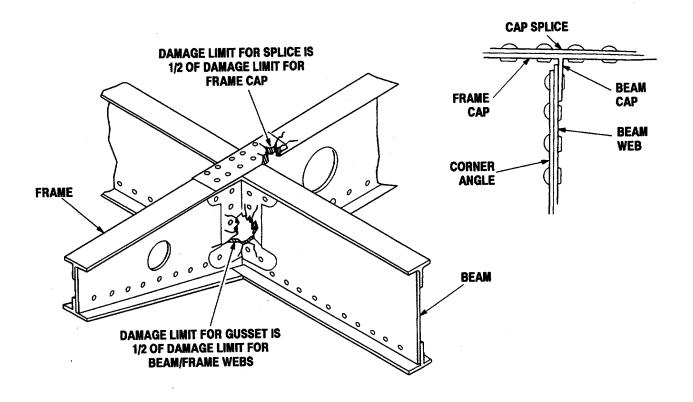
Evaluating Damage to Splices, Straps, Doublers, and Gussets (Sheet 2 of 2)
